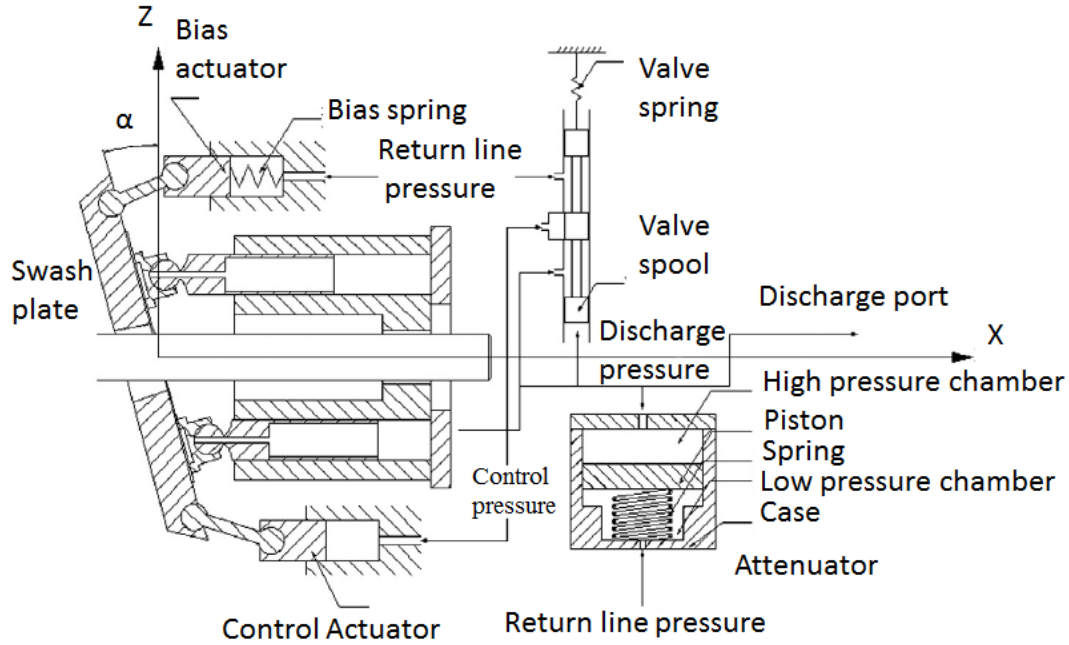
A cross-sectional view of the pressure controlled axial-piston pump [17]
